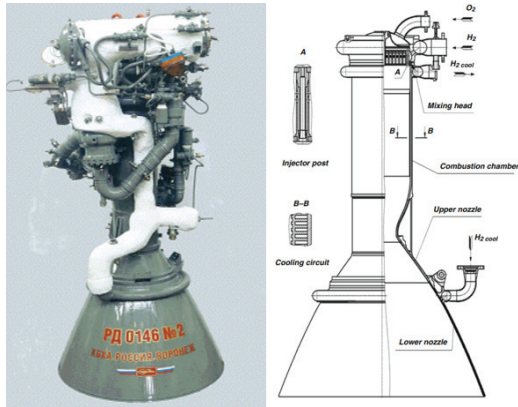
RD-0146 engine and combustion chamber with a ribbed inner surface[57,58].
